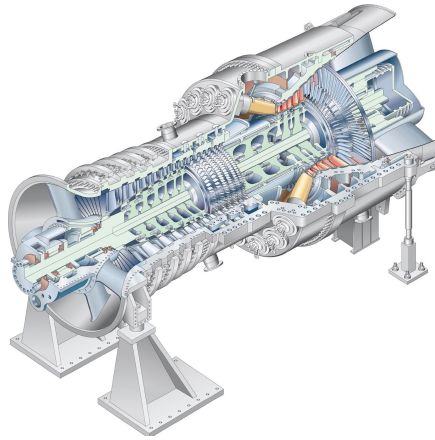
Drawing of a Siemens large gas turbine with cross sectional cut. (with permission from Siemens AG)
